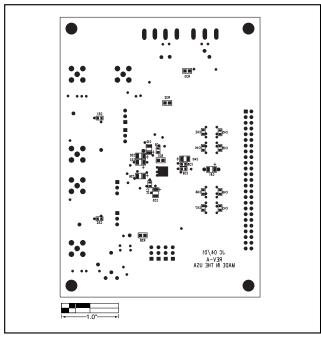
MAX1181 EV Kit Component Placement Guide— Solder Side
